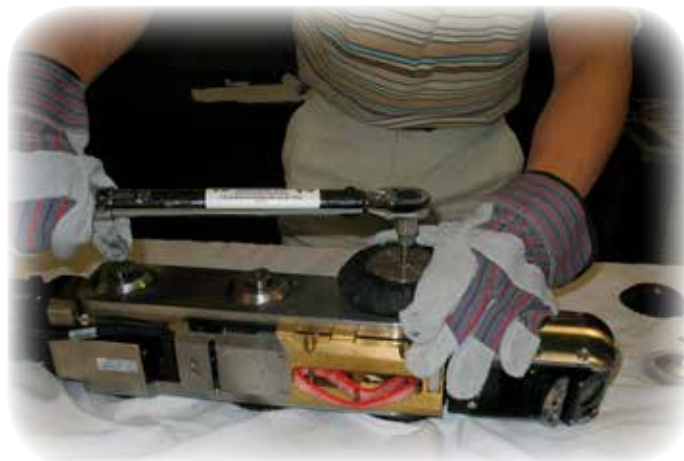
Pictures for the 10" rubber wheel assemblies...note the insertion of the applicable spacer and screw prior to securing to the transporter body.
